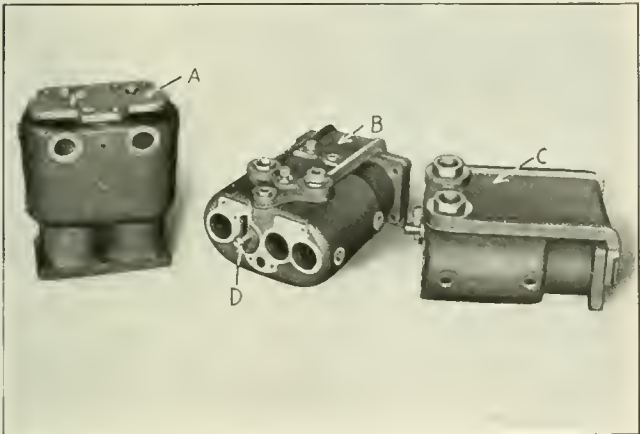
Jigs for Drilling the Various Small Holes in the Cylinder Castings
